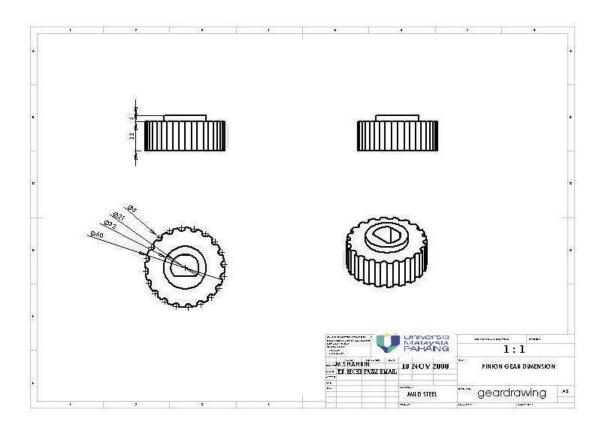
Pinion gear dimensions (APPENDIX B)
